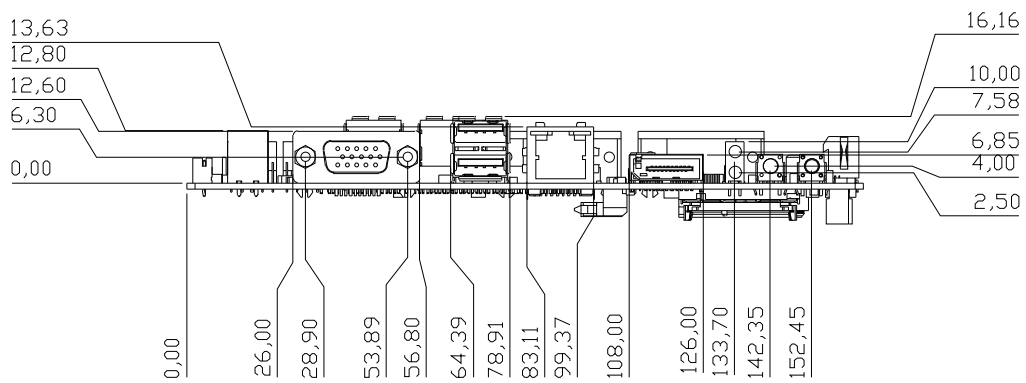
MIOe-DB2000 Mechanical Drawing (Top Side, with optional DC Jack)
